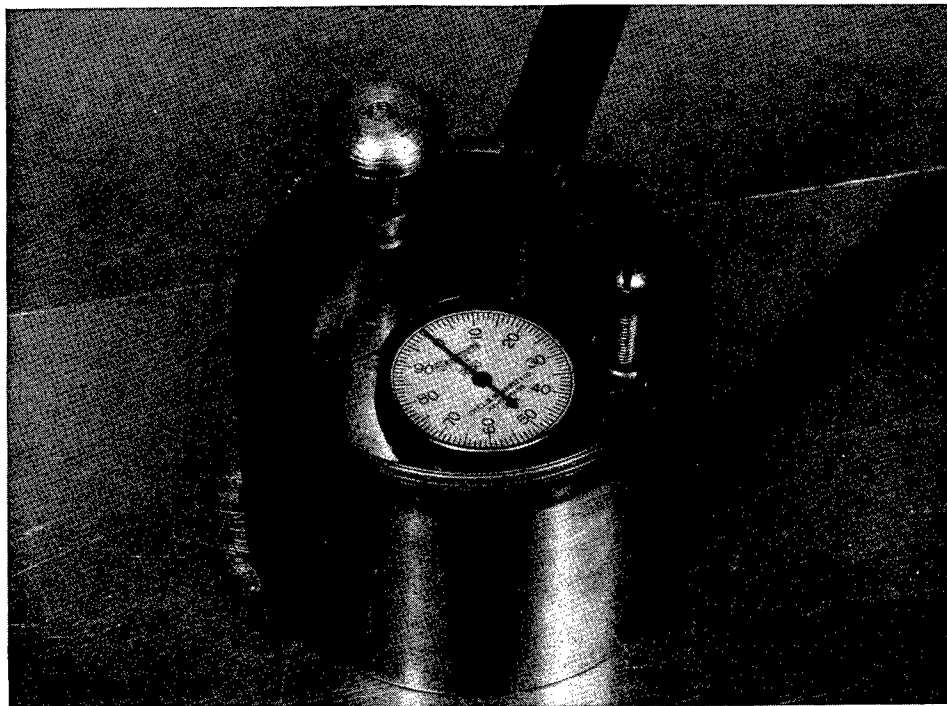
Vacuum-cup device for testing bond in flat sandwich parts.
